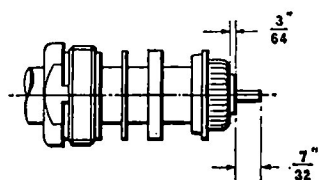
D—Assembly instructions—C Type plugs and sockets—Pressure sleeve cable clamp
